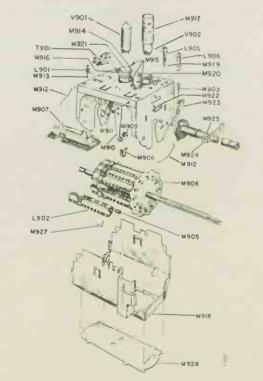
Exploded View of VHF Tuners 94D151-5 and -6 Used in Later 16J1, 16K1, 16R1CB and 16S1CB Chassis.
